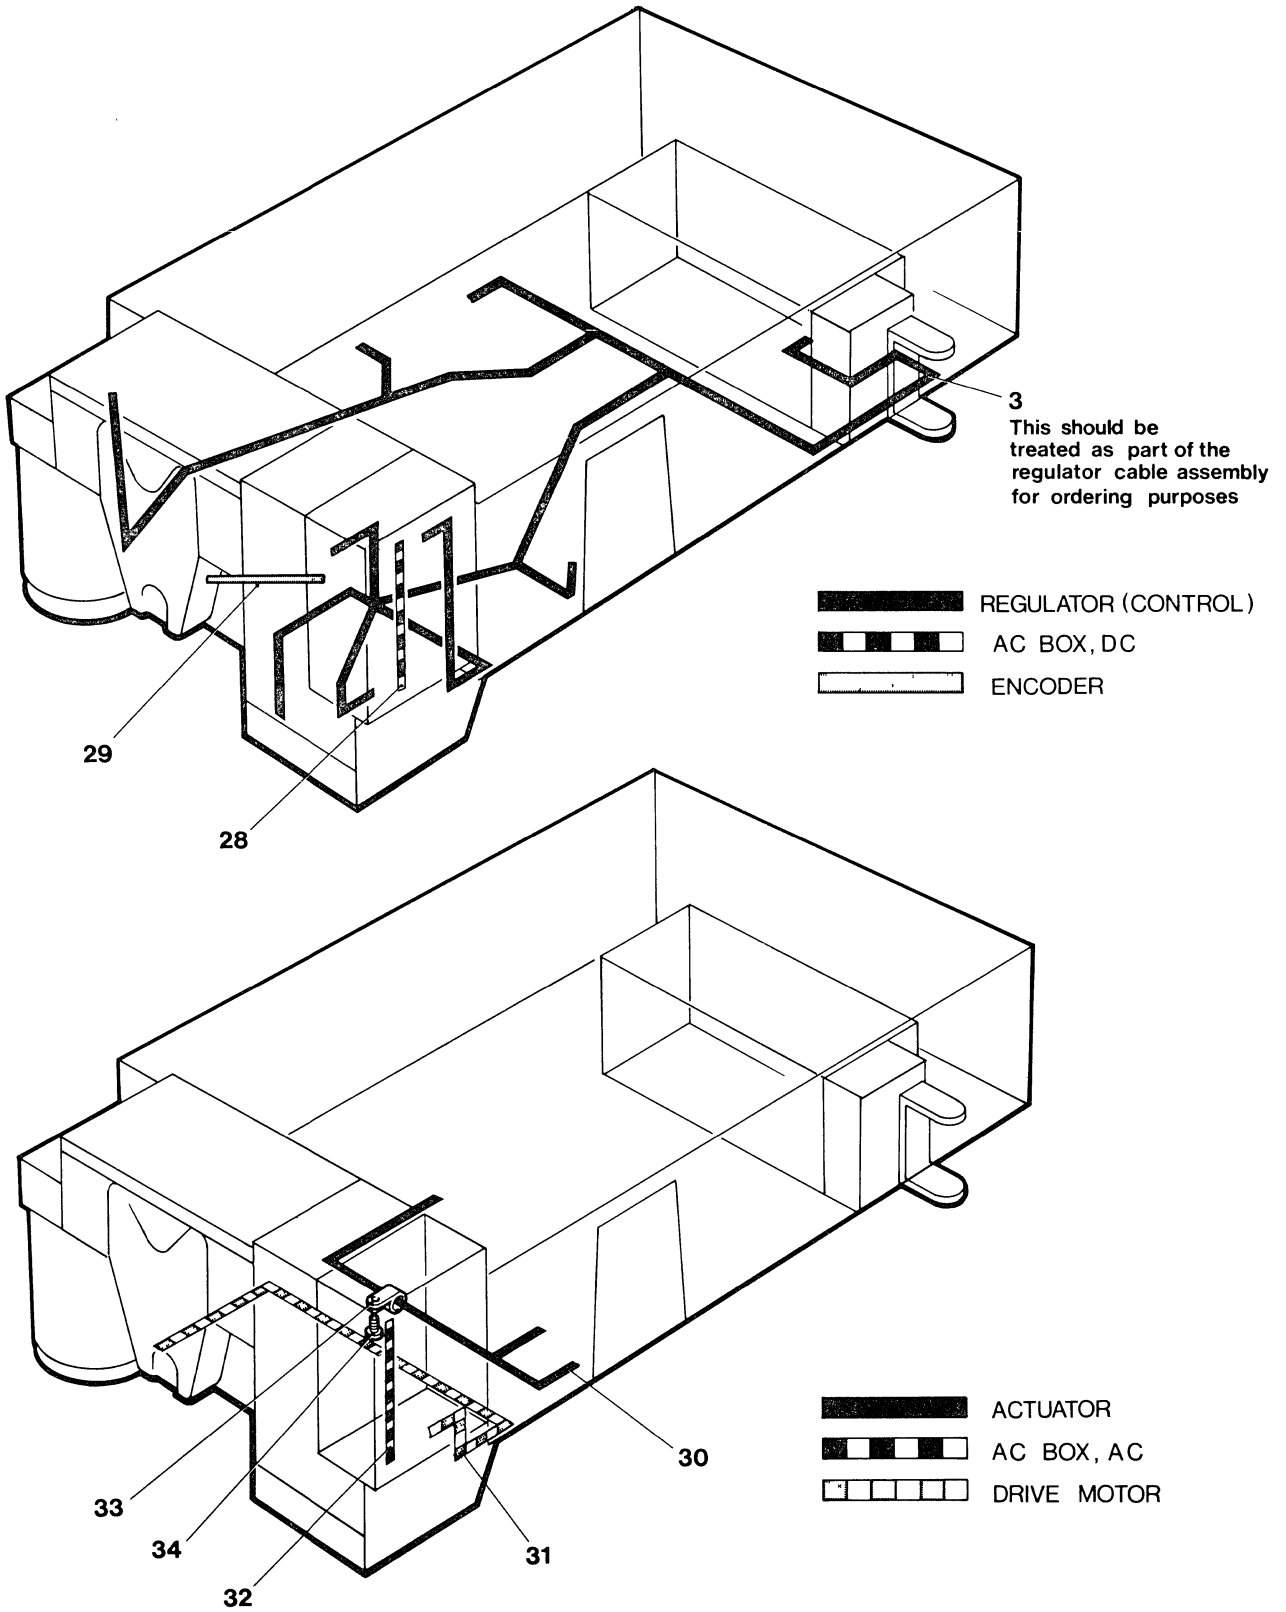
CABLE ASSEMBLIES (PART 2 OF 2)
